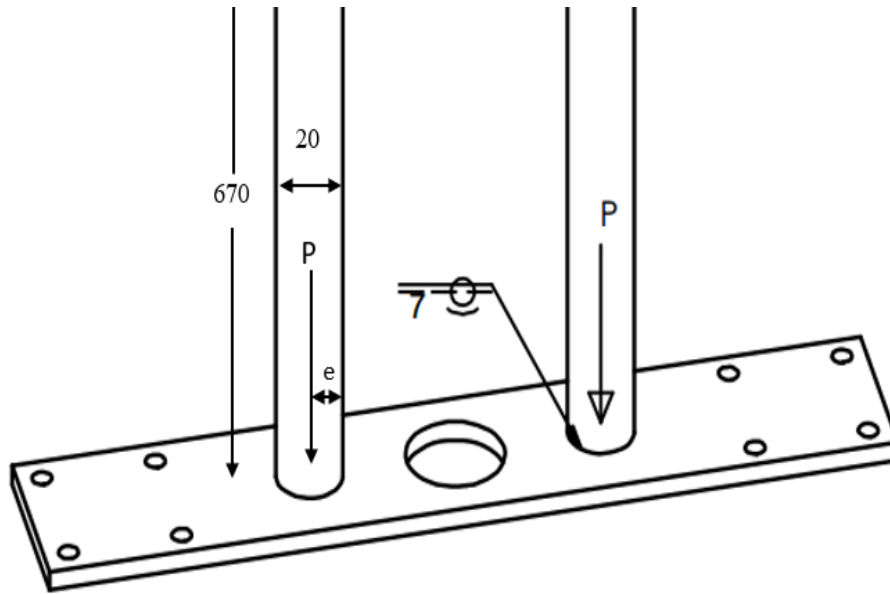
Fillet weld on circular guide rods (dimensions are in mm)
